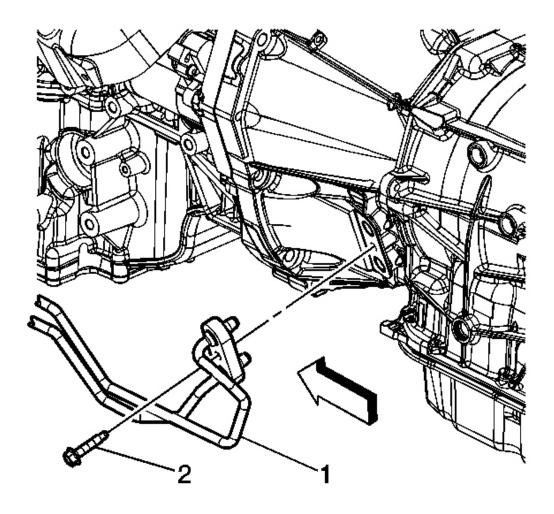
View of Transmission Fluid Cooler Pipes Courtesy of GENERAL MOTORS CORP.
